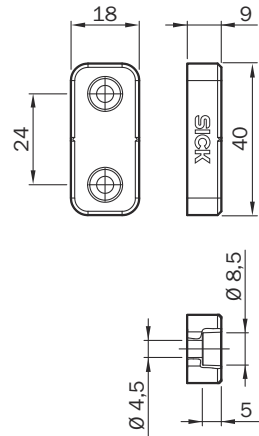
Dimensional drawing of "Flat" STR1 actuator
